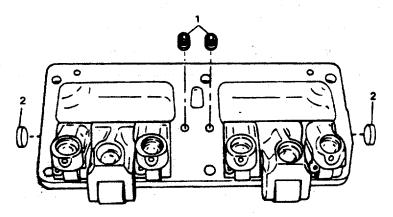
Cam Follower Lockscrews and Plugs.
